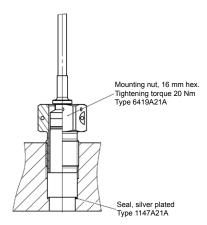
Sensor installation with mounting nut Type 6419A21A and seal Type 1147A21A
